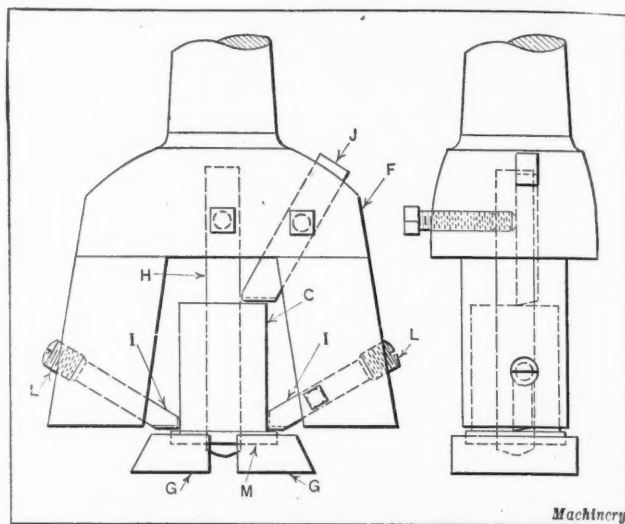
Facing Tool employed on Vertical Drilling Machine
